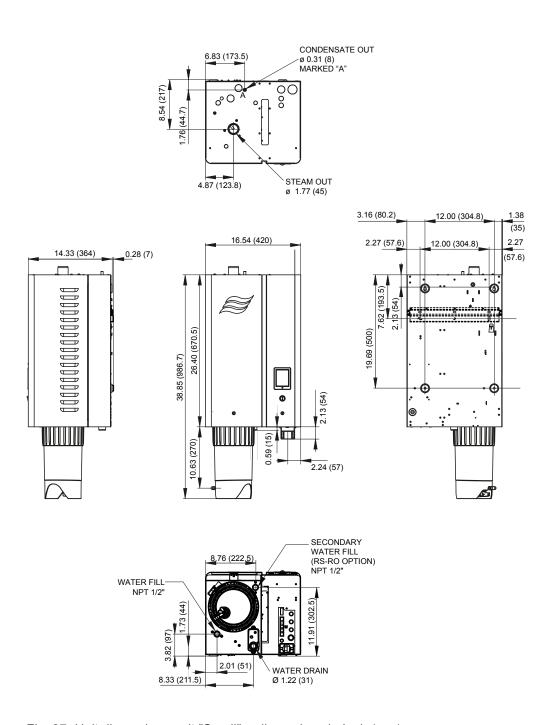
Unit dimensions unit "Small" - dimensions in Inch (mm)
